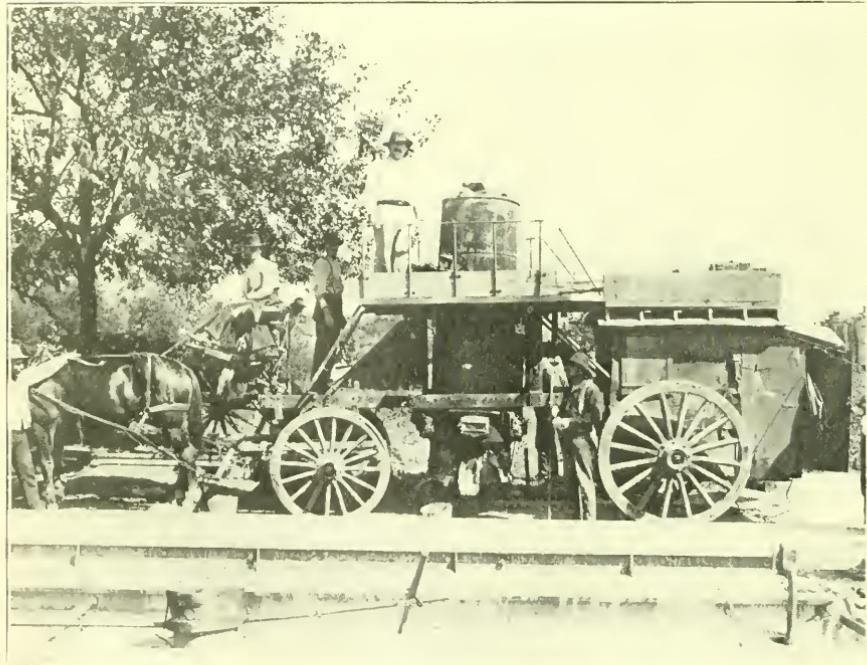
PORTABLE CUPOLA FOR CAST WELDING.
